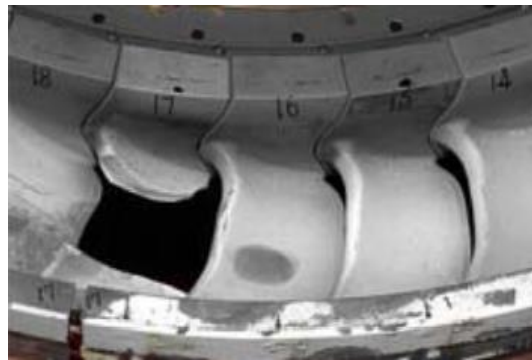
Nozzle Failure occurred after combustion but prior to turbine blades.
